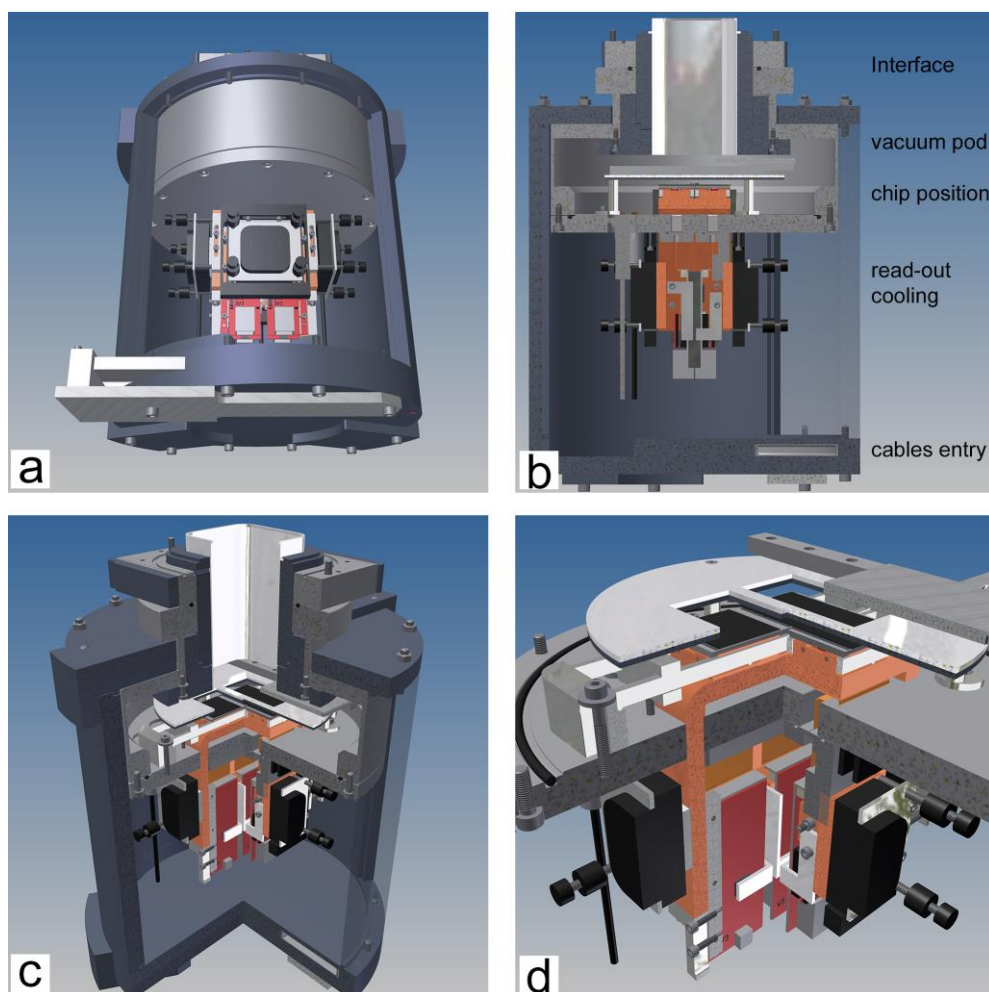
Design drawings of the camera showing (a) bottom to top view of the read-out and cooling of the non-vacuum part, (b) side view of a 180° cross section, (c) side view of a 90° cut-out, (d) 90° cut-out of the bottom vacuum flange showing detector chips, readout, and cooling (van Genderen, 2015). The assembly is holding four 512x512 pixel Timepix quad chips, and was developed to fit on-axis underneath a FEI Titan Krios TEM below a FEI Falcon direct electron detector. The Timepix chip assembly, read-out, and control software were provided by Amsterdam Scientific Instruments (Amsterdam, the Netherlands). The detector chips are covered by a single 300 μm thick Silicon sensor layer, allowing extraction energies of up to 200 kV on a TEM without having any significant damage to the Timepix ASICs (Faruqi & McMullan, 2011). The camera is cooled by a single water loop at four different positions from which the detector chips are being cooled (Peltier controlled) in pairs, to have a stable temperature of 2 ± 0.1 K below ambient temperature. The Relaxd read-out boards (Visser *et al.*, 2011) are directly cooled by the water loop.
